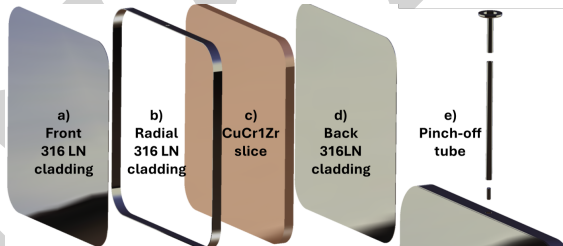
316LN welded together to make a leak-tight vacuum capsule around the CuCr1Zr.
